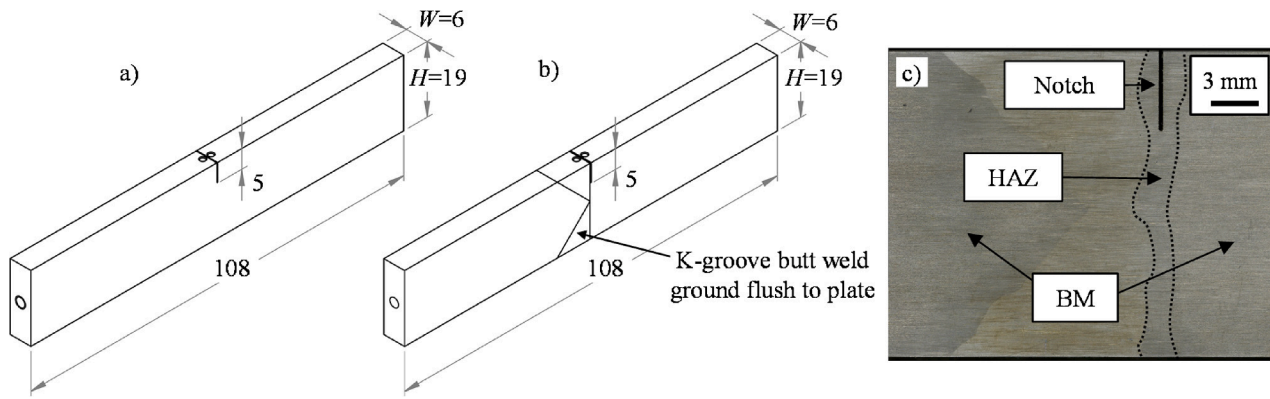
SENB specimens made of: a) S355J2 + N, b) welded S355J2 + N, with the EDM notch inside the HAZ, c) macrograph of a welded specimen showing the EDM notch location.
